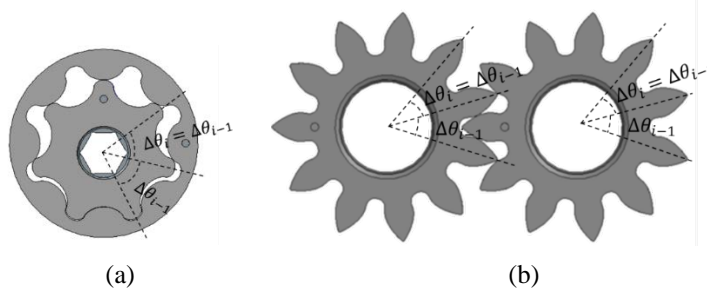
Structures of gear-type pumps: (a) internal gear type, (b) external gear type.
